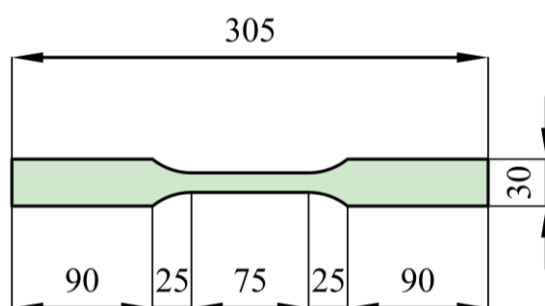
Cold-formed steel coupon geometry (unit – millimeters)
